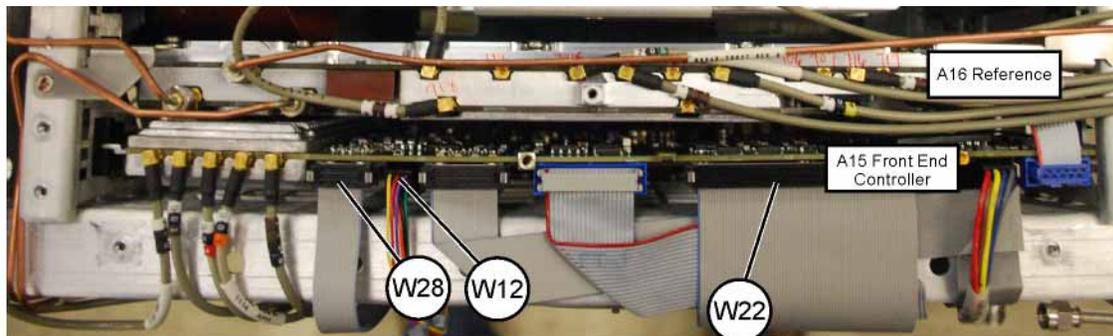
Front End Assembly Side Cables Replacement - Options 508, 513, 526
